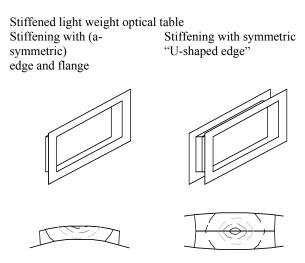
Improved thermo-mechanical stability due to table with U-shaped edge
